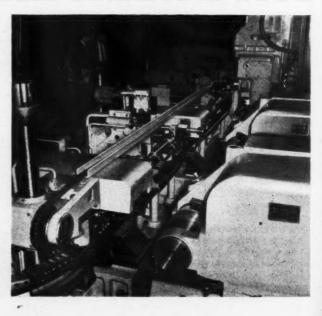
The actuating mechanism for the fourth transfer bar comprises a length of roller chain and two sprockets, one of which is turned through rack and pinion by the vertical hydraulic cylinder at the left
